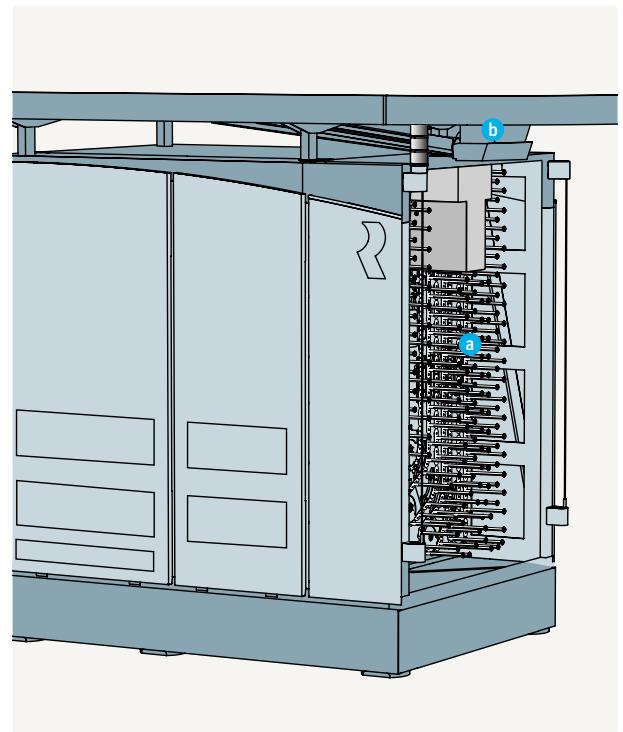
Empty tube magazine (a) with tube handling system (b) on the end frame of a rotor spinning machine
